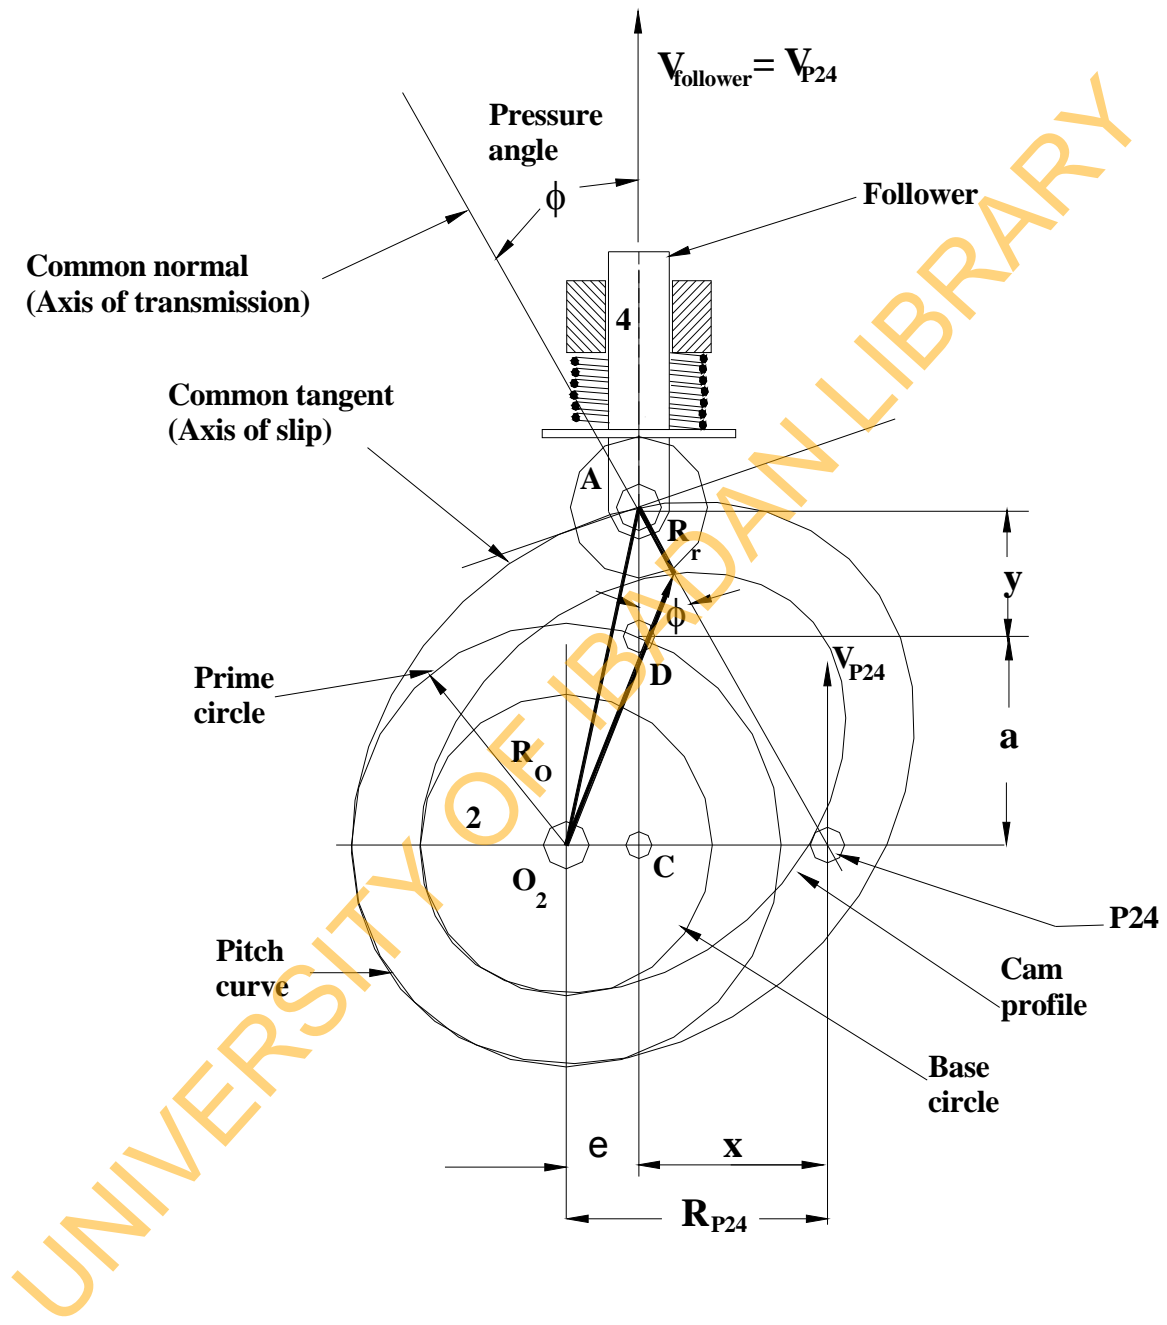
Plate Cam in Contact with Reciprocating Roller Follower
